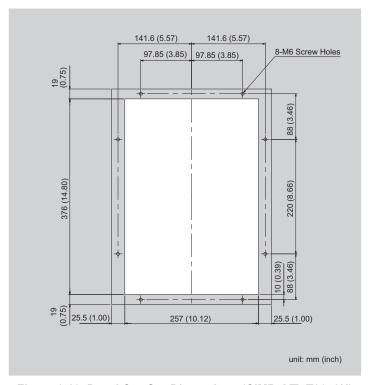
Panel Cut-Out Dimensions (CIMR-A□4T0058U)
